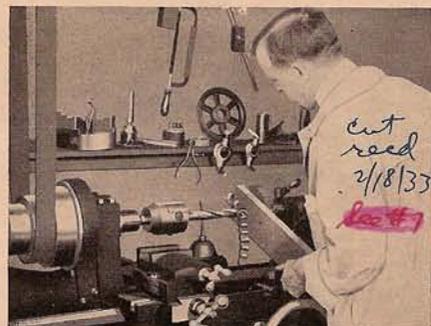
Lathe used as Drill Press for Drilling Hole in Flat Piece of Work.
